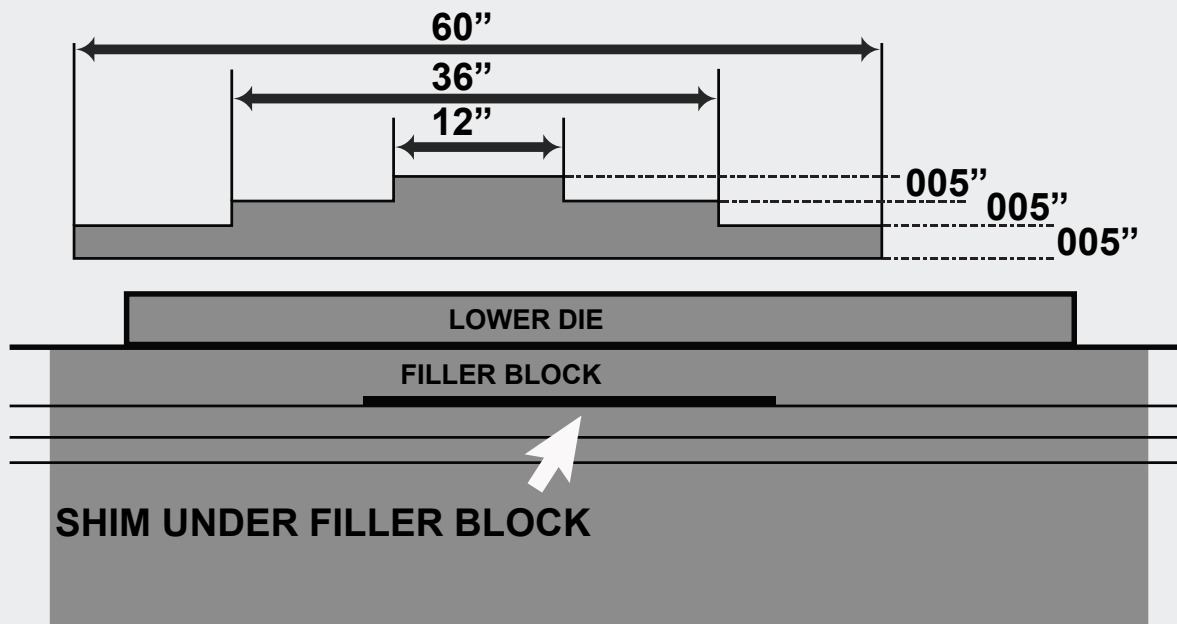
TYPICAL SHIMMING CONFIGURATION
